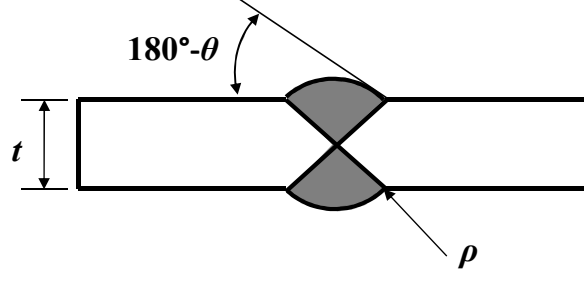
A schematic diagram showing on the contact angle (θ), plate thickness (t), and local weld toe radius (ρ).
